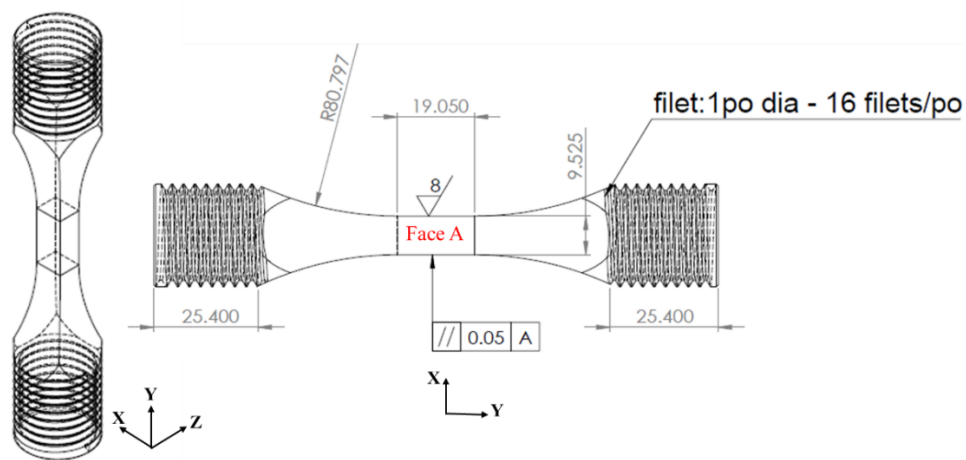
Manufacturing drawing of the fatigue specimens (all dimensions in mm).
